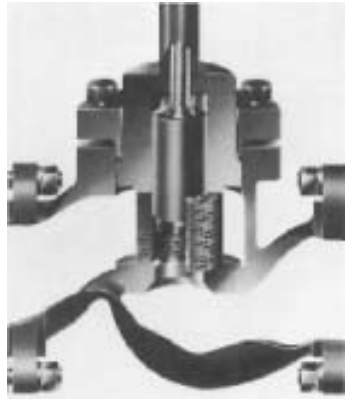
Control valve with flow through labyrinthine orifices in built-up cage (Control Components)
